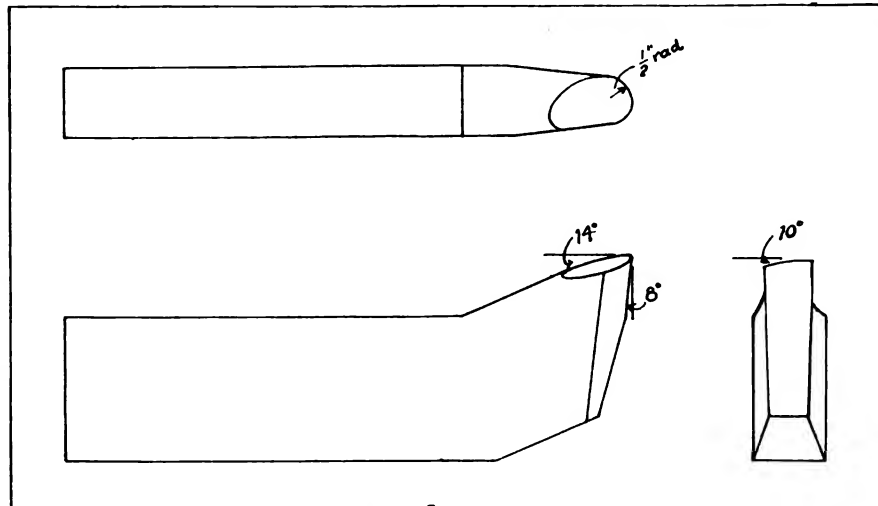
THE TOOL TAKEN WAS A STANDARD CUTTING TOOL
